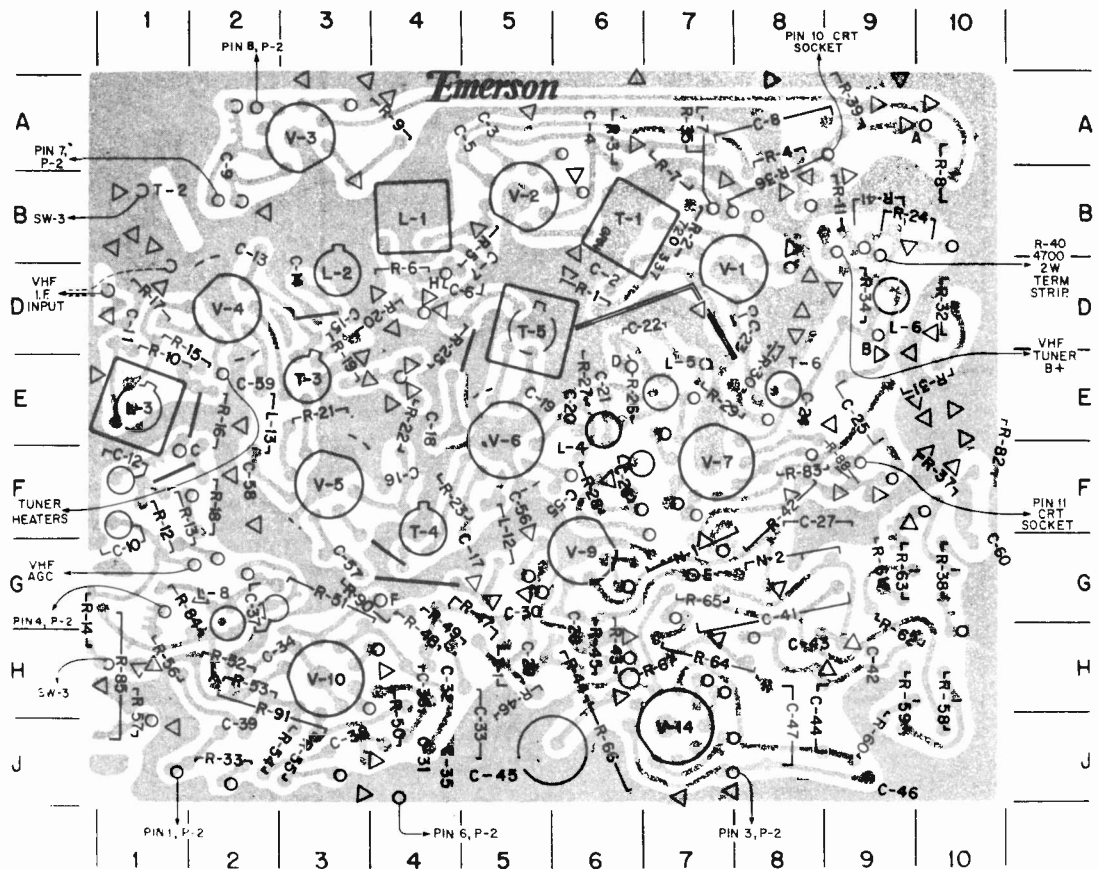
Etched Printed Circuit Board Chassis (Top View)
